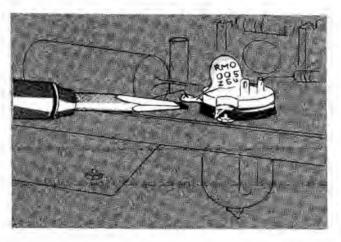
Soldering to a terminal. Note the slight fillet of solder—exaggerated for clarity—formed around the wire.
